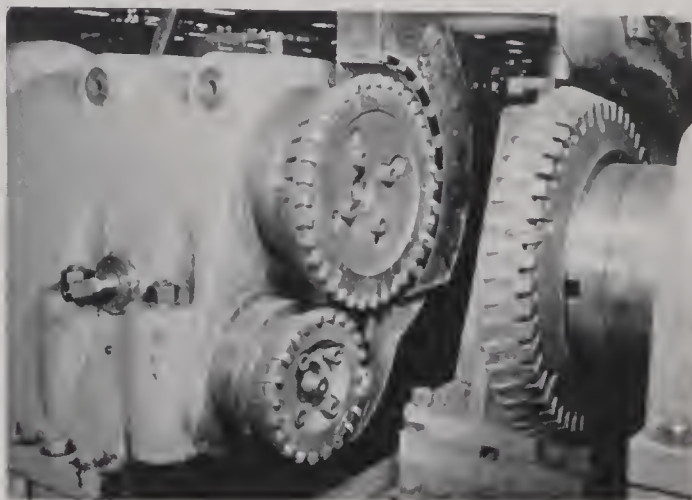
Example of hoods for cast-iron milling operations (courtesy Detroit Diesel Engine Division, General Motors Corporation).
